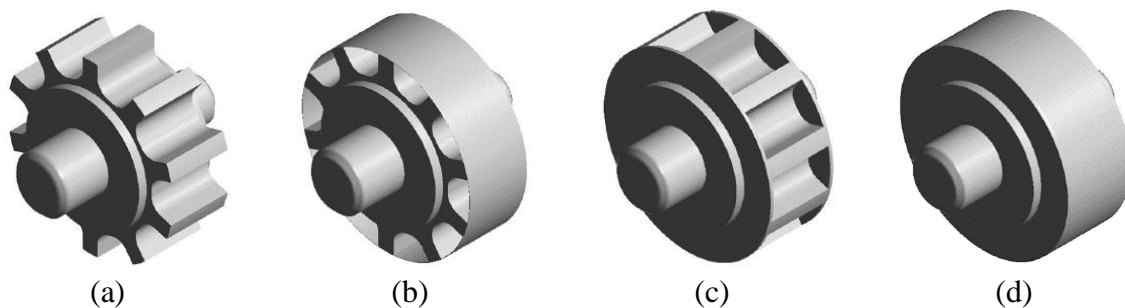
Windage loss reduction structure (a) Original rotor structure (b) Rotor with ribs (c) Rotor with shrouds (d) Full cylindrical rotor [133]
